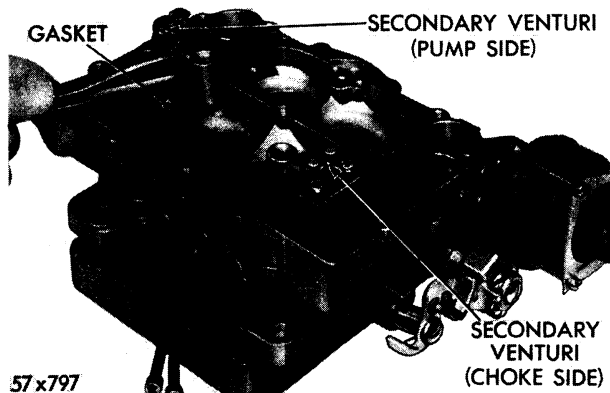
Removing or Installing Secondary Venturi (Choke Side and Pump Side)
